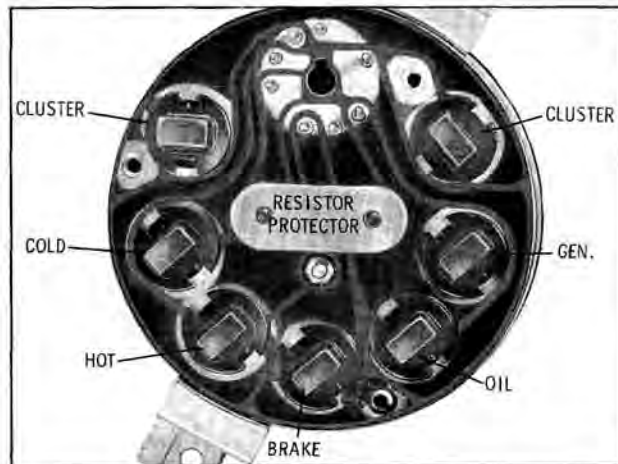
Rear View of Fuel Gauge and Telltale Assembly
